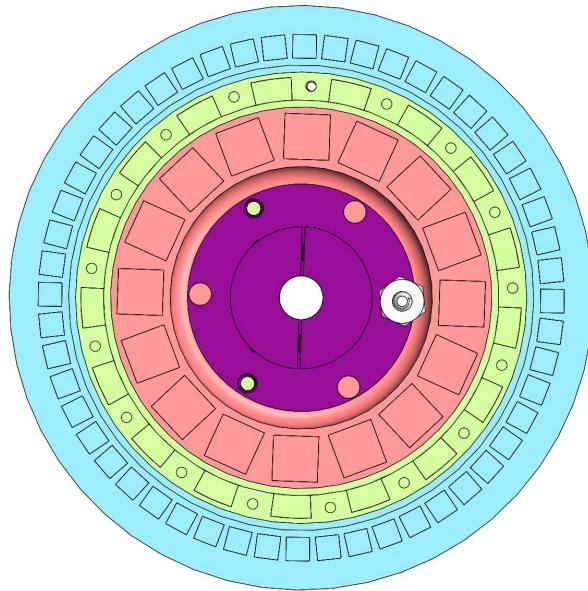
The circular gear as seen from the axial view. The inner rotor is pink, the flux modulator is green, and the outer rotor is blue. Bearings are brown and the input and output shafts are grey(Assembly.SLDASM).
